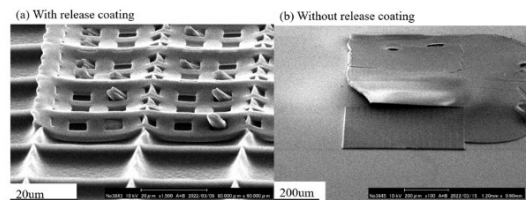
(a)Mold after transfer with mold-release processing. (b) Mold after transfer without mold-release processing.
